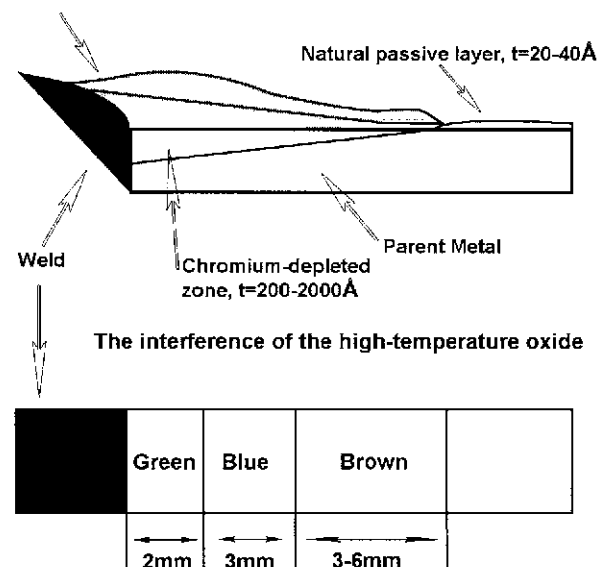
Oxides Formed on the Root Side During Welding of Stainless Steels - A General Characterisation.
